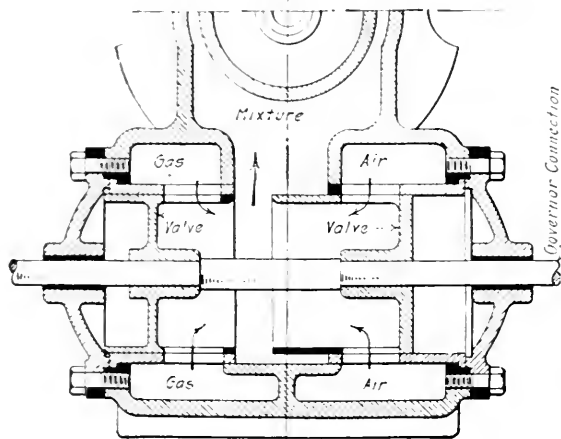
SECTION THROUGH THROTTLE VALVE OF A HORIZONTAL DOUBLE-ACTING GAS ENGINE
